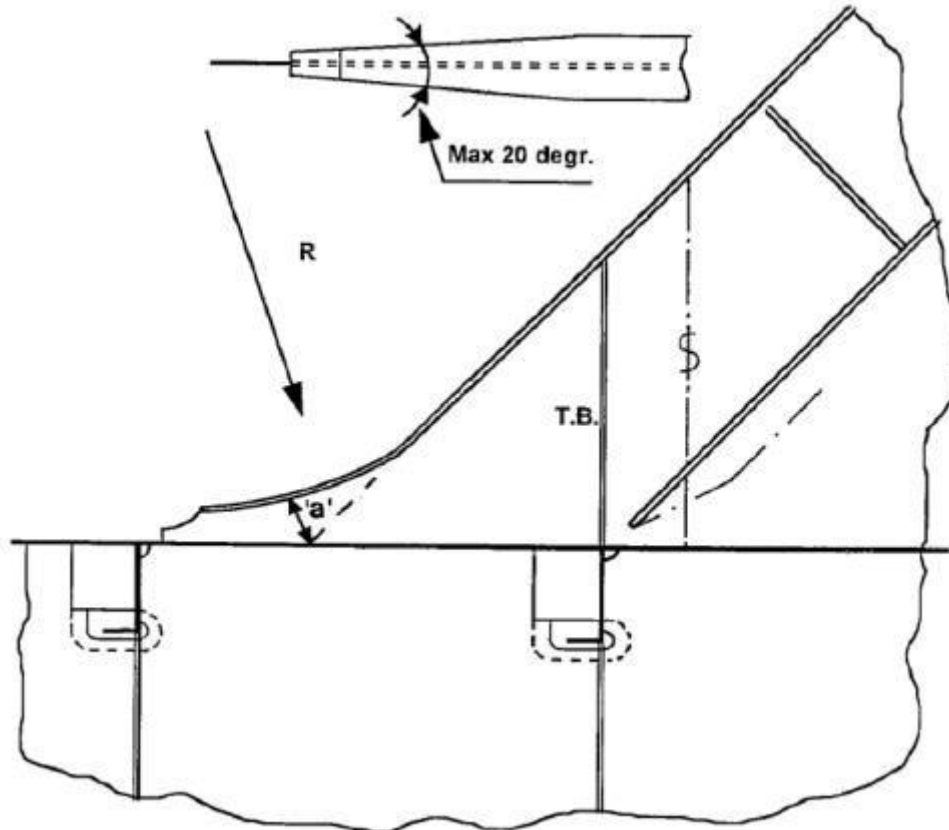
Detail Type of Bracket Toe, Symmetrical Flange Plate in location of Web Frame connections
